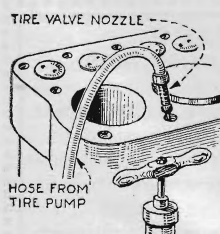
A tire pump will prove useful in cleaning out bolt holes that have become filled with carbon
